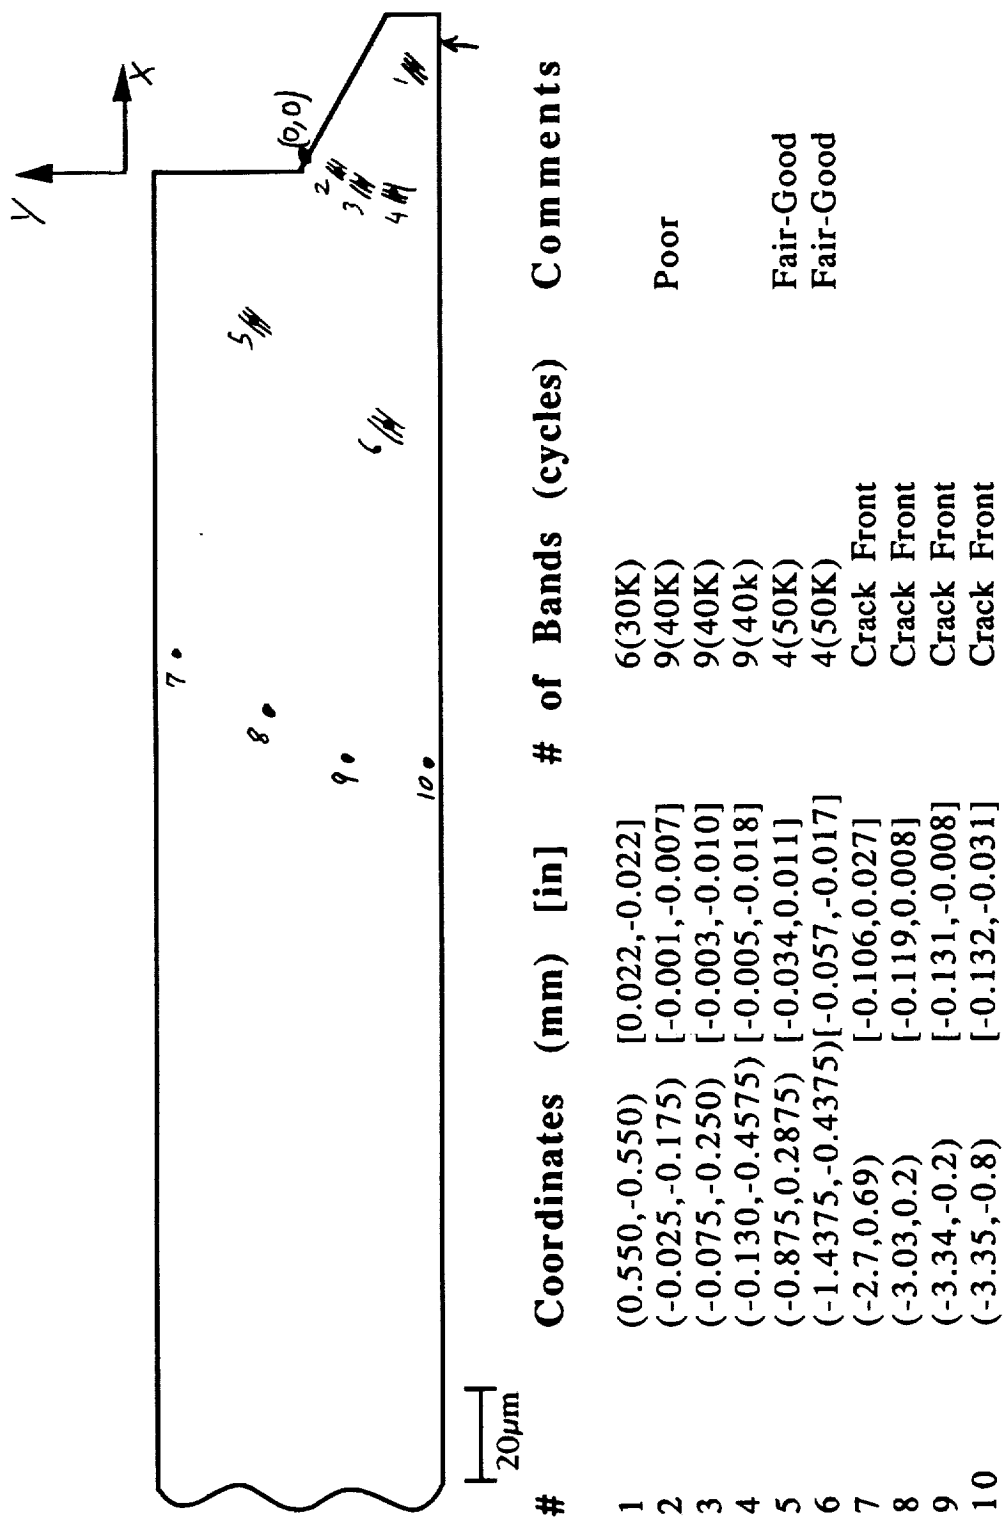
Rivet hole schematic: Upper rivet row, hole number 4J6, fatigue crack growth is in the forward direction.
